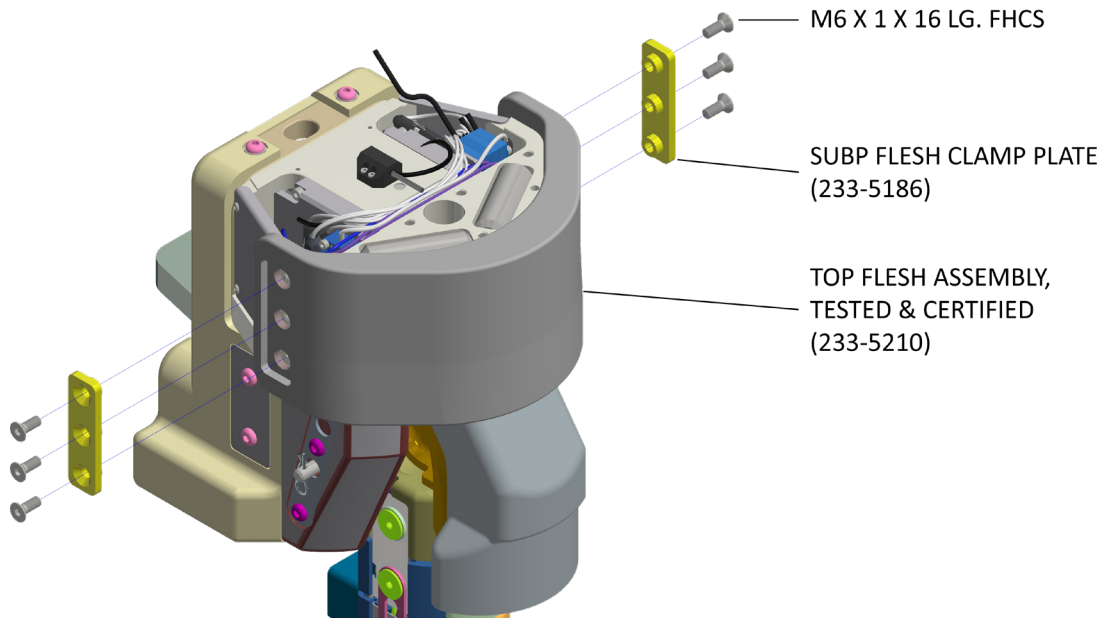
Remove the Flesh Clamp Plates and the Top Flesh Assembly
